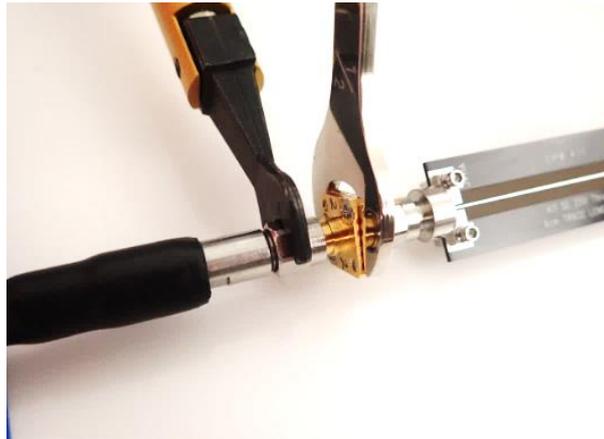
Example of using 2 wrenches to minimize twisting while torquing the connectors into place.
